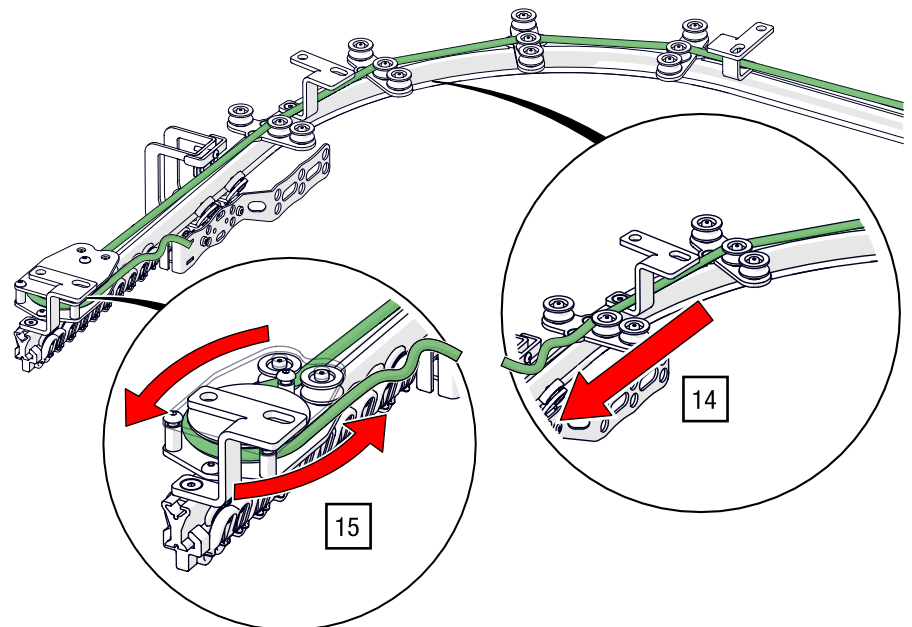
Top cord operation – Guide cord end through the return pulley into the master runner (return pulley shown without cover plate).
